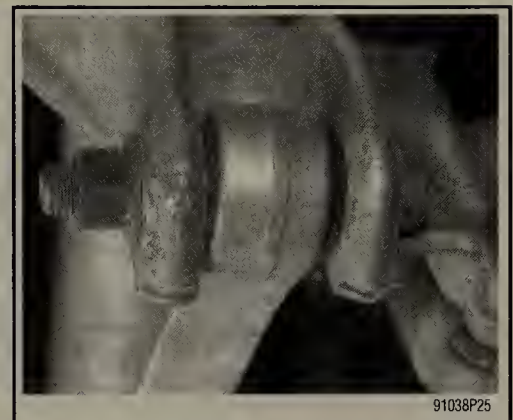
The control rod is secured to the knuckle with a bolt and nut
